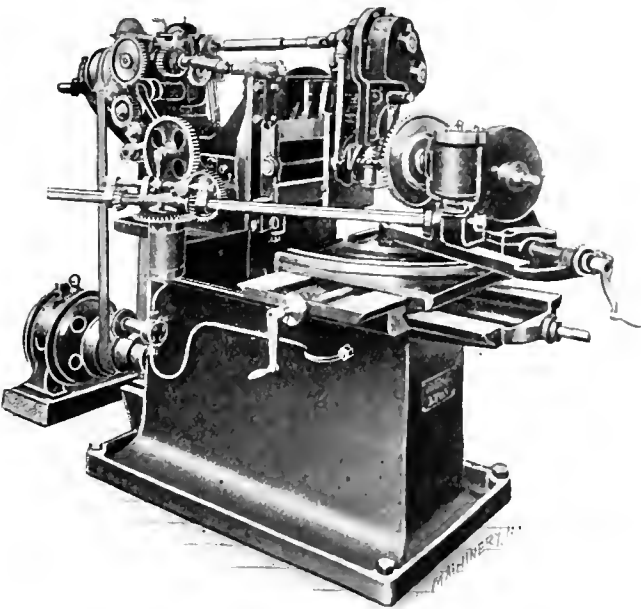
The Chambon Continuous Bevel Gear Hobbing Machine, employing the Cutters shown in Fig. 178.
